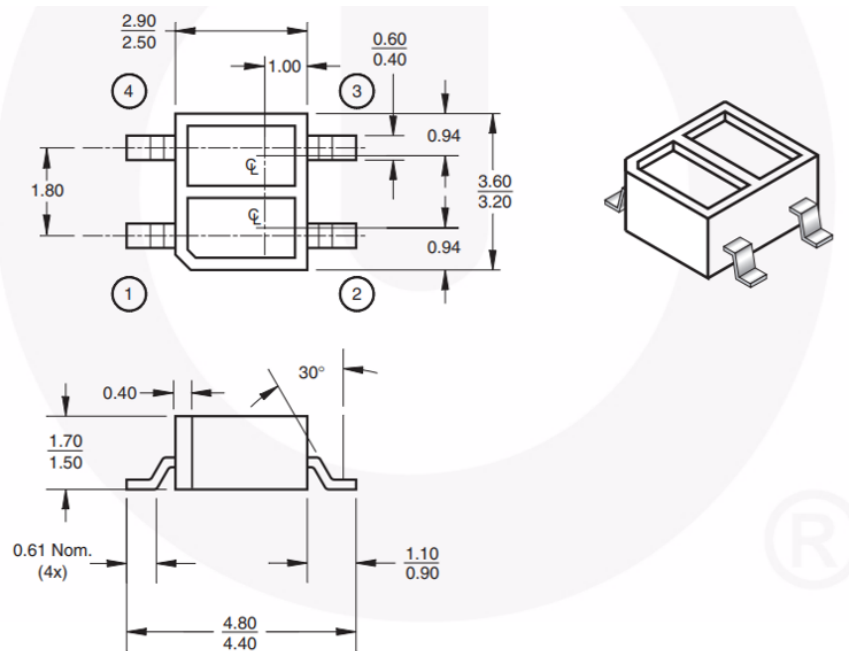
A dimensioned (mm) drawing to show the compact size of the QRE1113 optical sensor. Figure adapted from [45].
